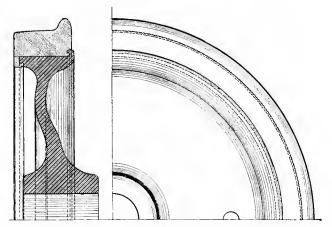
Boies No. 2 Coach Wheel. Wrought Iron Disc Center with Tire Secured by Shrinkage and Integral Lock.
